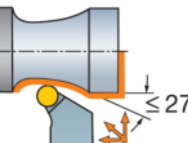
Insert is installed and clamped in a tool holder
